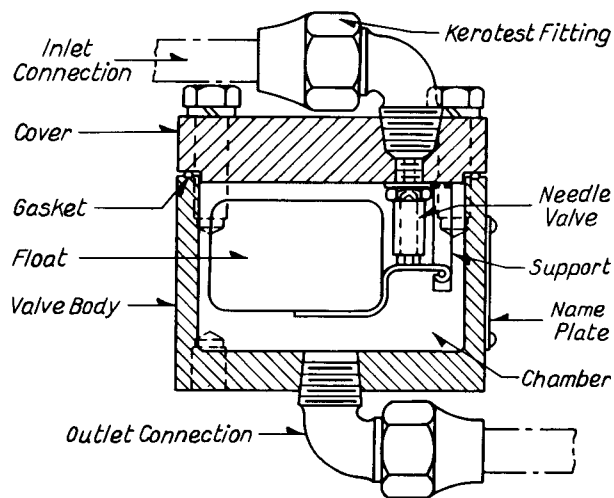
AUTOMATIC HIGH PRESSURE VACUUM VALVE
